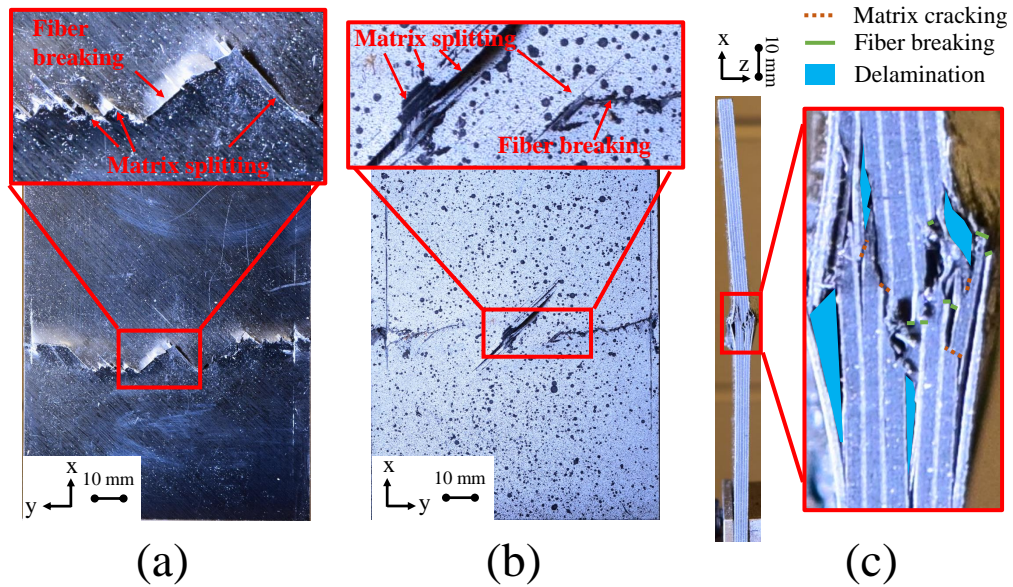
Surface inspections of the CAI-induced damage of a layup B sample: (a) non-impacted surface, (b) impacted surface, and (c) side view.
